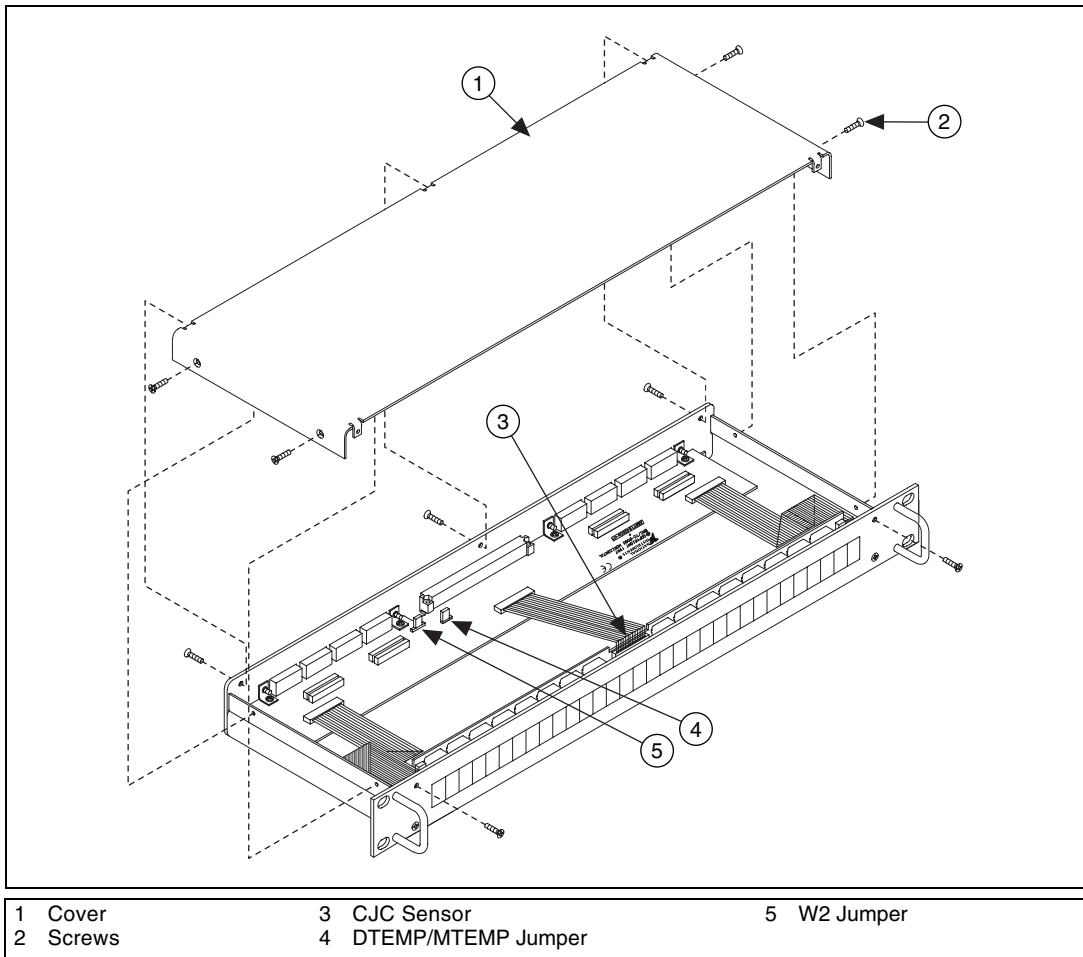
TC-2095 Terminal Block Parts Locator Diagram
